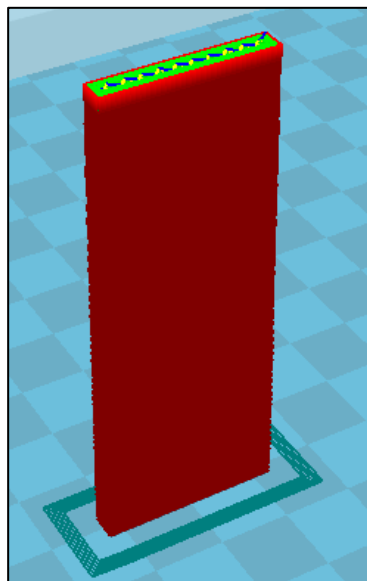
CURA LAYER VIEW MODE OF UPRIGHT D3039 SPECIMEN
